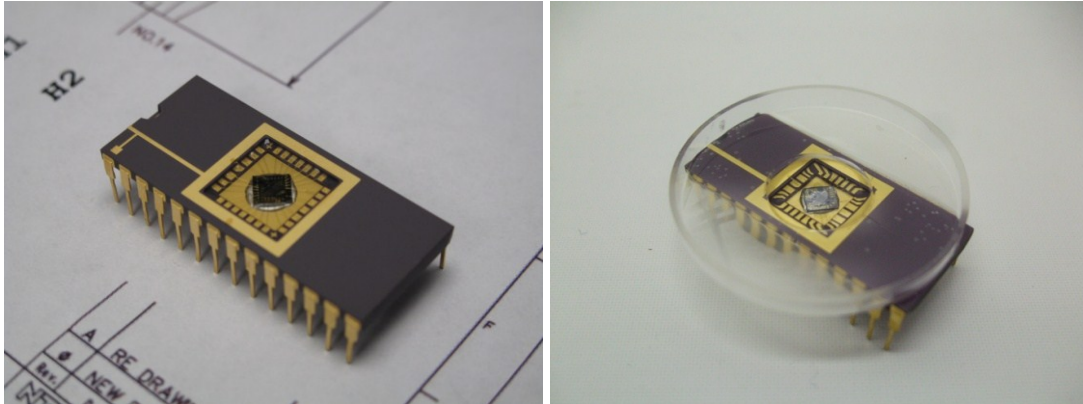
A typical 28-pin DIP following PDMS encapsulation and final packaging.
